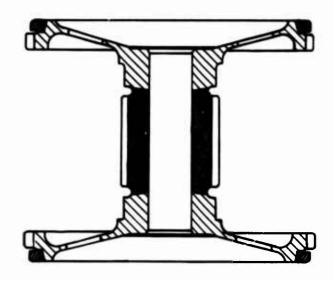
First-Row Pinion - Butt Weld Configuration.
